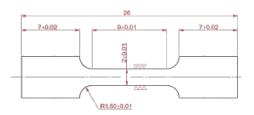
Geometry and dimension of miniature tensile specimen for irradiated materials
